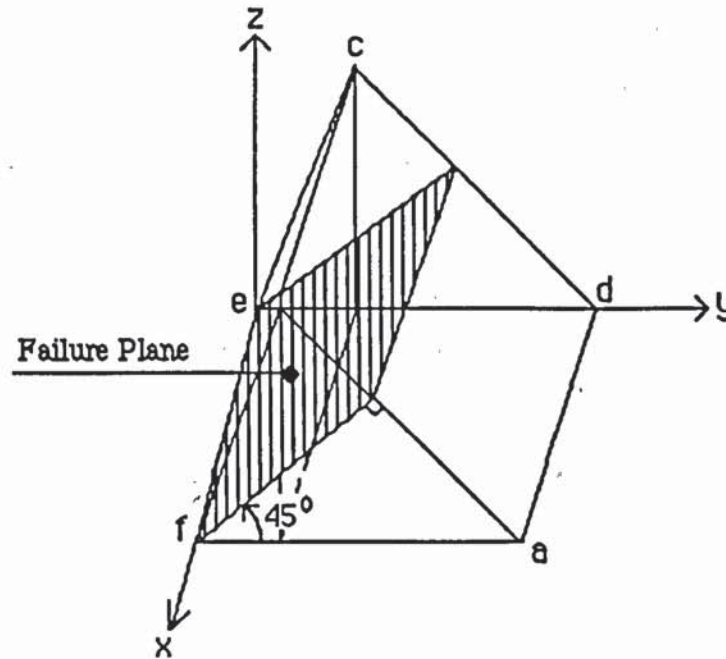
Predicted failure plane for longitudinal shear fillet weld.
